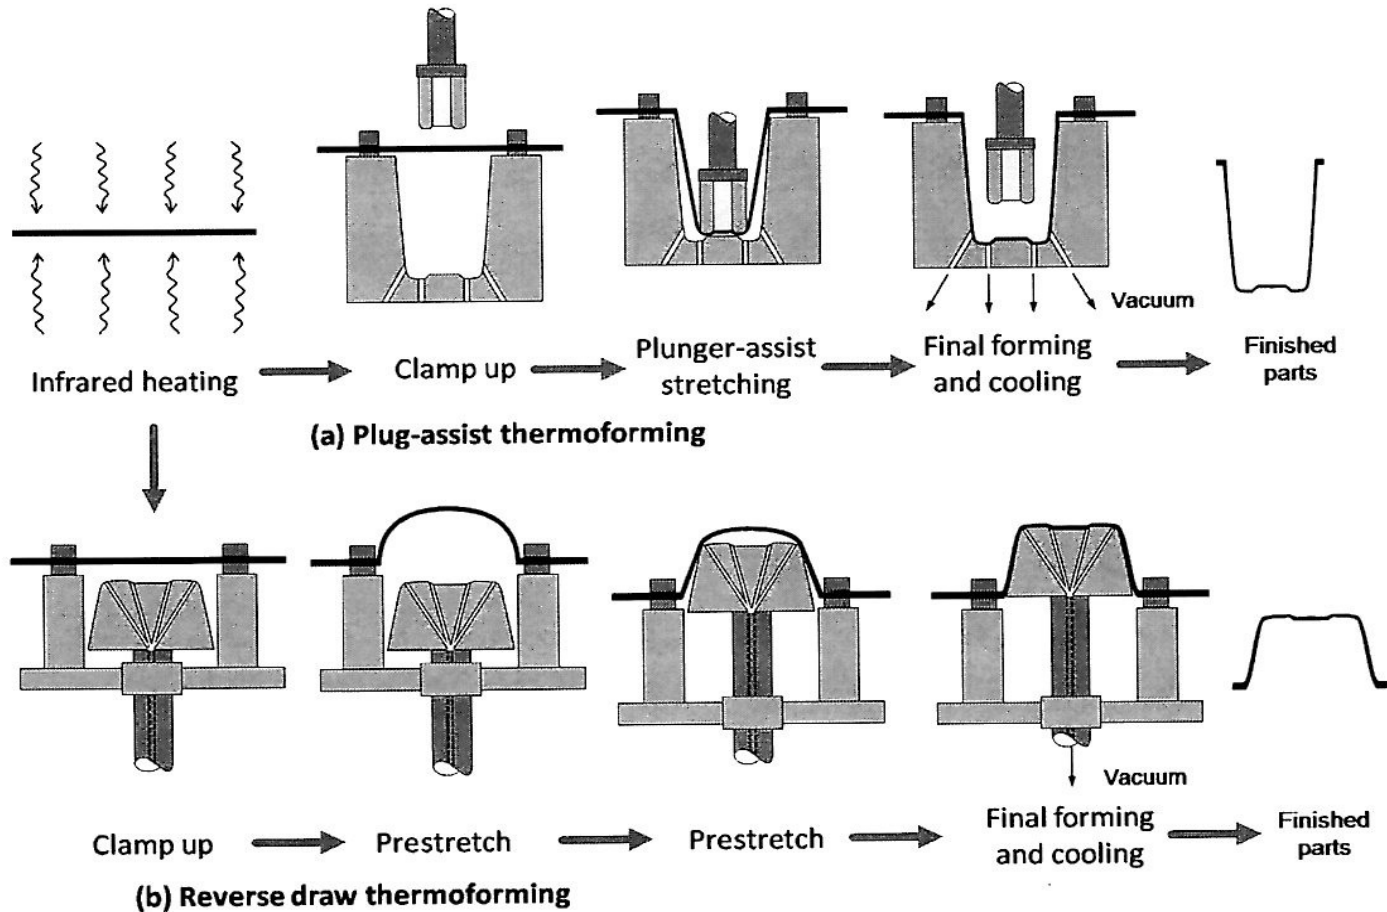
Thermoforming of heated sheet over a female mold using plug-assist drawing and a male mold using reverse drawing processes.
